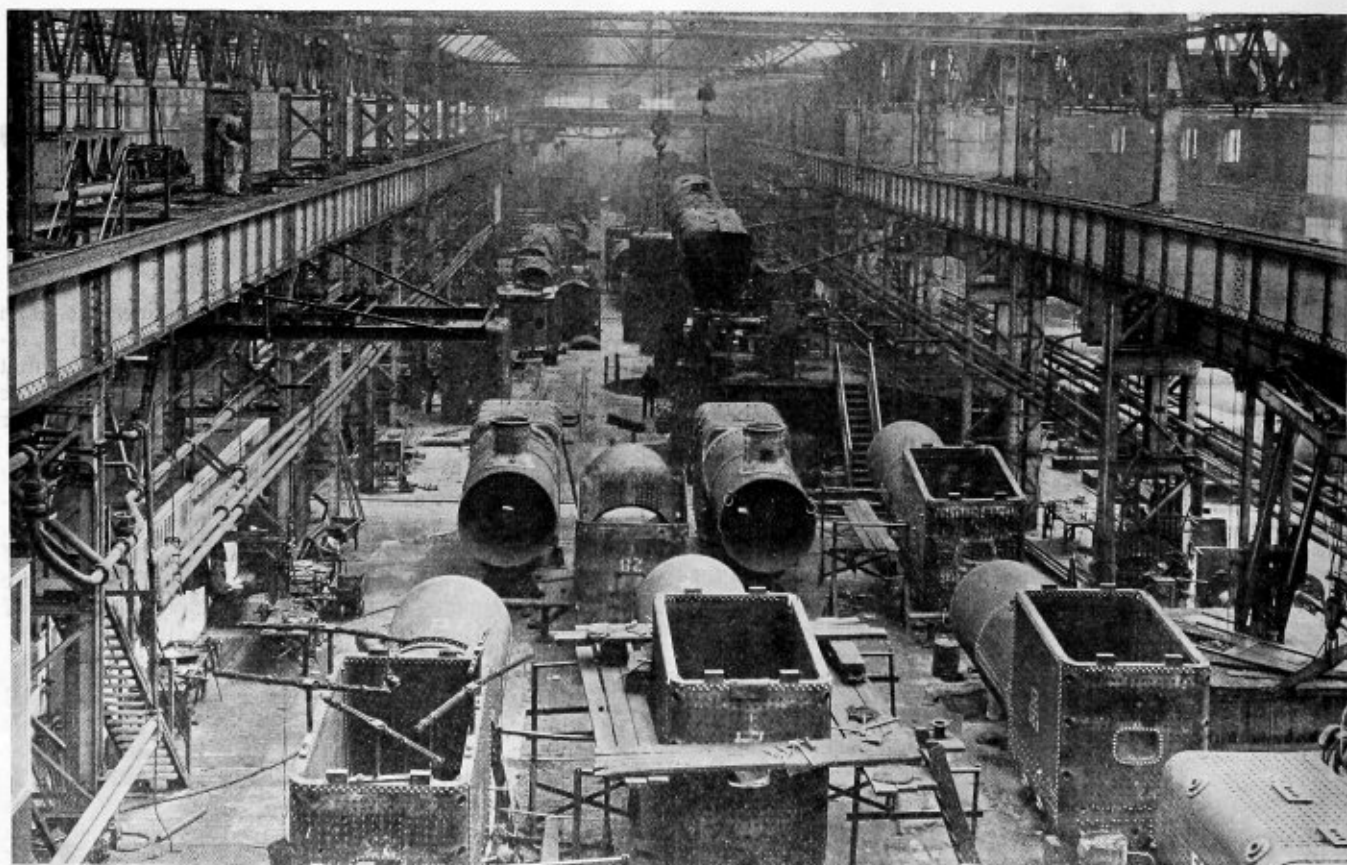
Main Bay of Boiler Shop Showing Boilers Being Assembled
